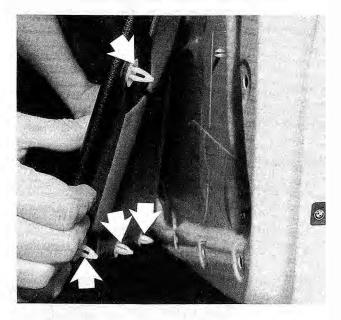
Door interior trim panel being removed, showing securing clips (arrows).
